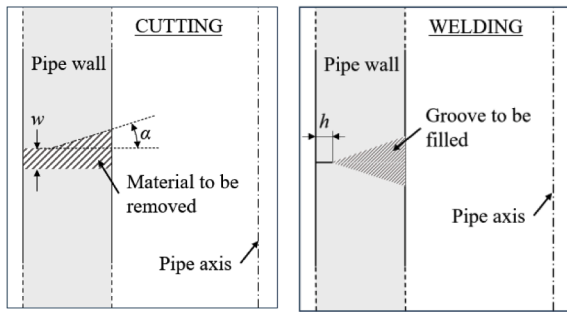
Schematic of the material to be removed by cutting and to be filled by welding (Not To Scale).
